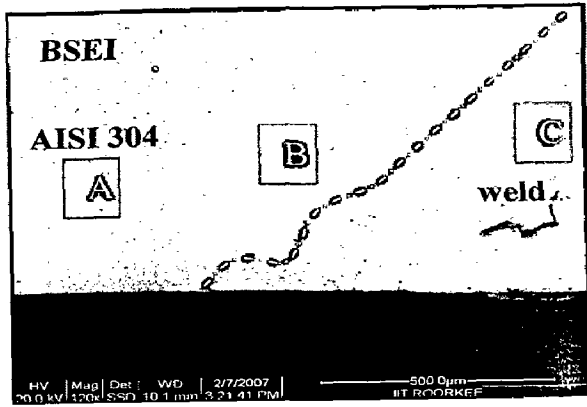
(B) BSEI and EDAX form cross section of dissimilar TIG weldment of AISI 304 and weld zone, subjected to cyclic hot corrosion in K_2SO_4 - 60%NaCl at $600^{\circ}C$ for 50 cycles, 120 X.
